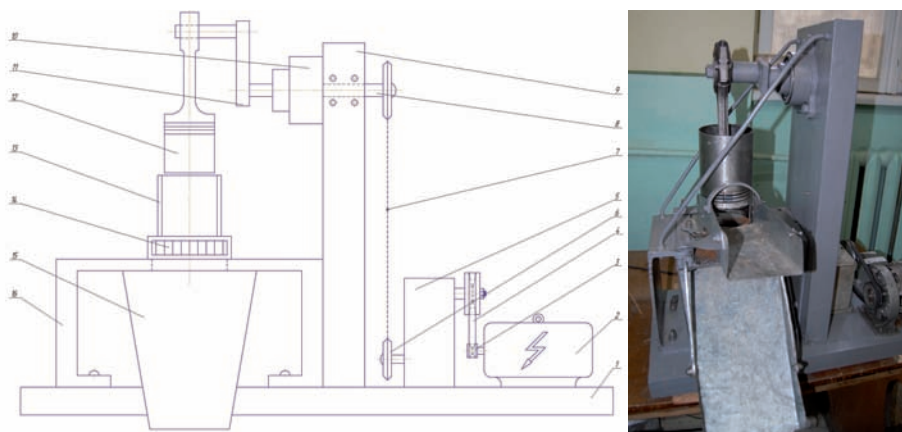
Drawing and general view of the fruit shredder: 1 – base, 2 – electromotor, 3 – drive pulley of belt gear, 4 – belt, 5 – cylindrical reducer, 6 – drive star, 7 – chain, 8 – shaft, 9 – fixed element, 10 – bearing unit, 11 – crank, 12 – piston, 13 – working cylinder, 14 – knife cassette, 15 – container, 16 – working desk.
